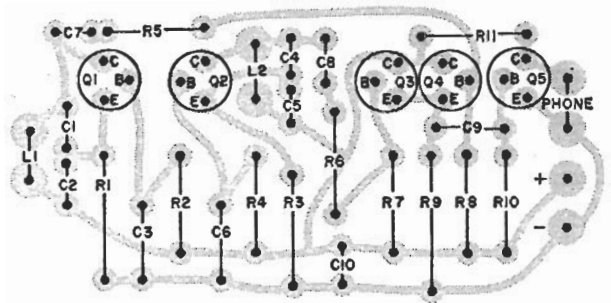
Actual-size foil pattern to be used in making the PC board.
